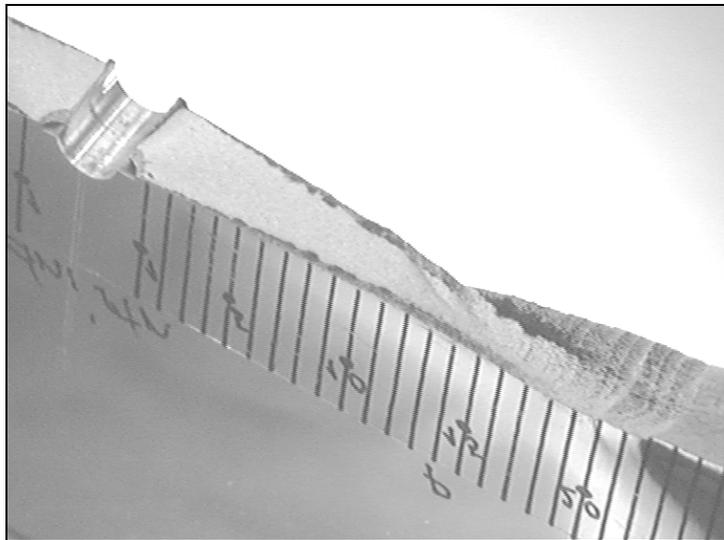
Typical fracture surface on the M(T) specimen [3].
